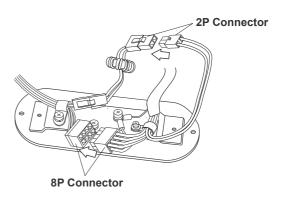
B Attaching Balance Arm Cable on Bottom Cover
